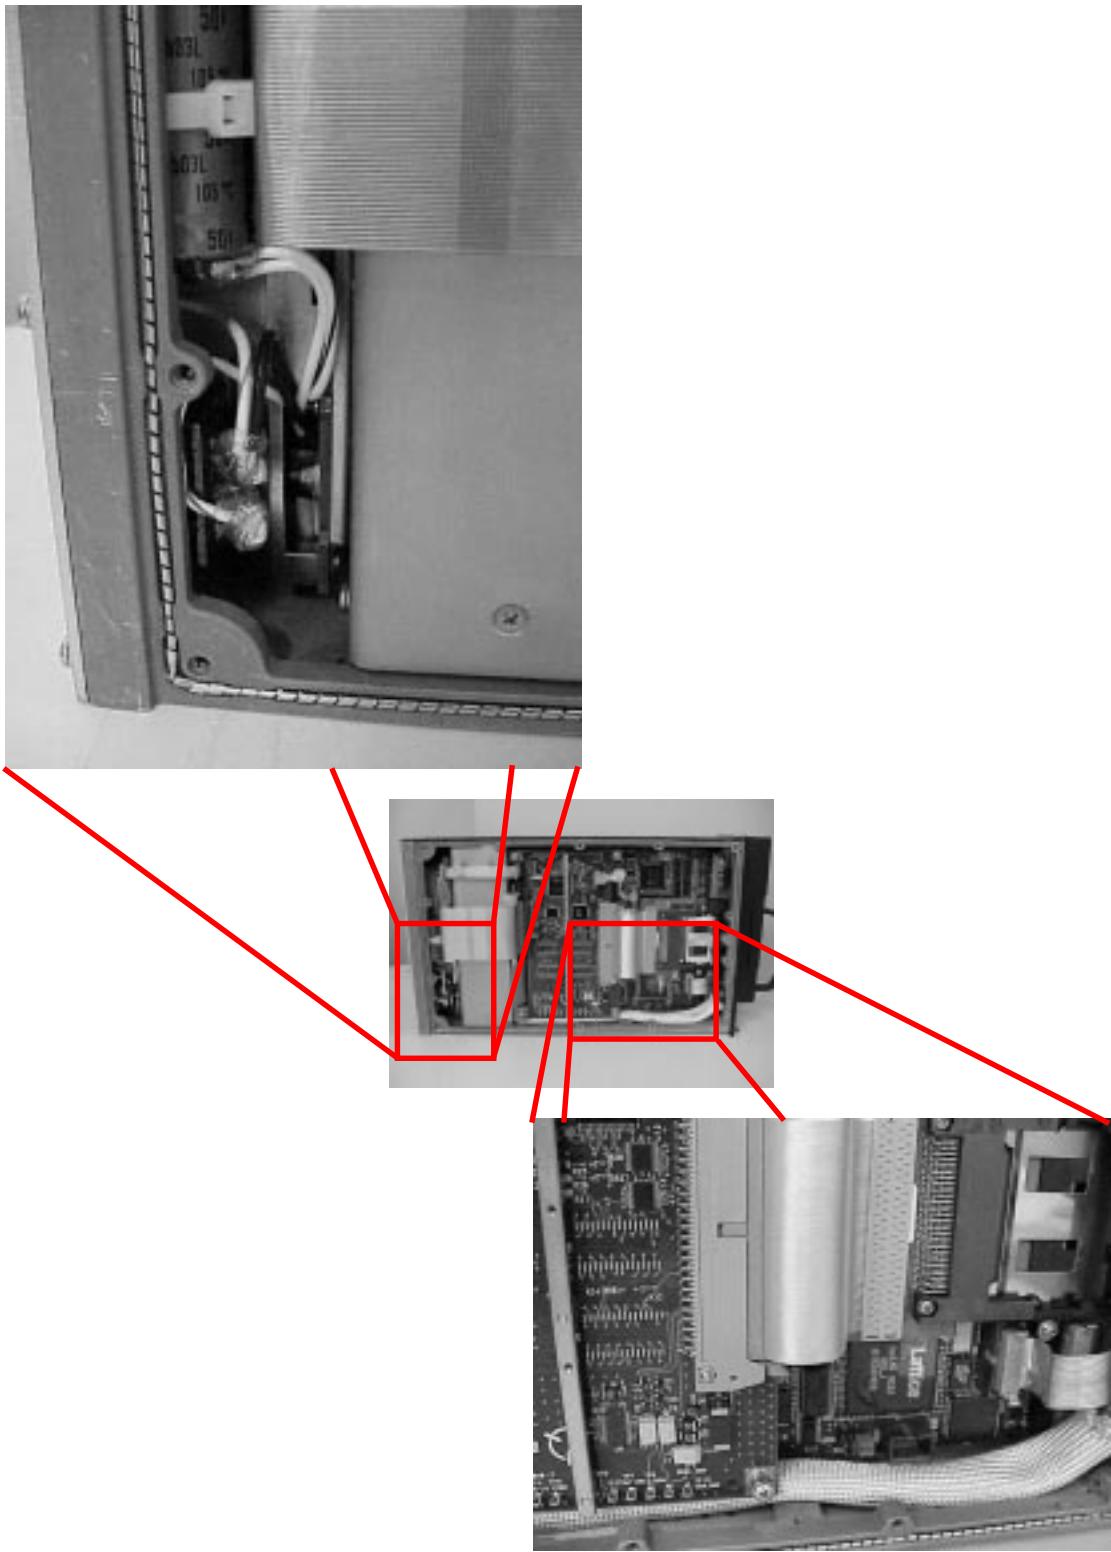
Close-up photographs of the Digital board to show typical construction features.
